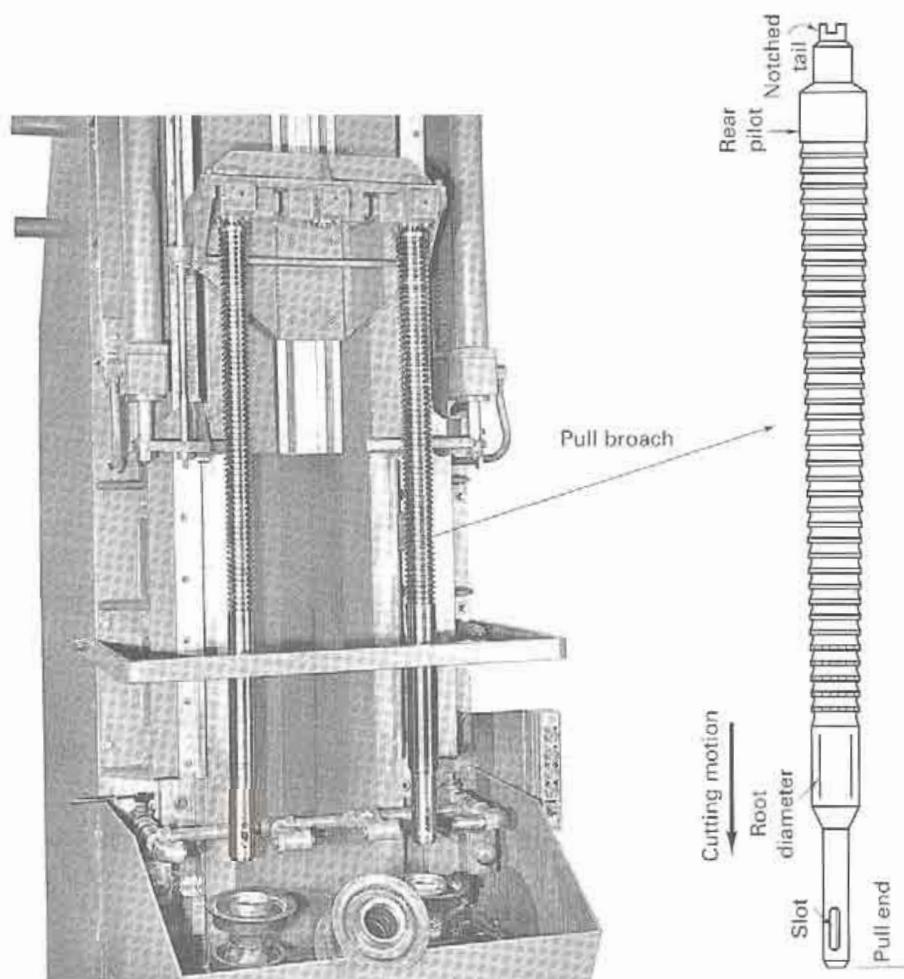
Vertical pull-down broaching machine shown with parts in position ready for the two broaches to be inserted. An extra part is shown lying at the front of the machine.
